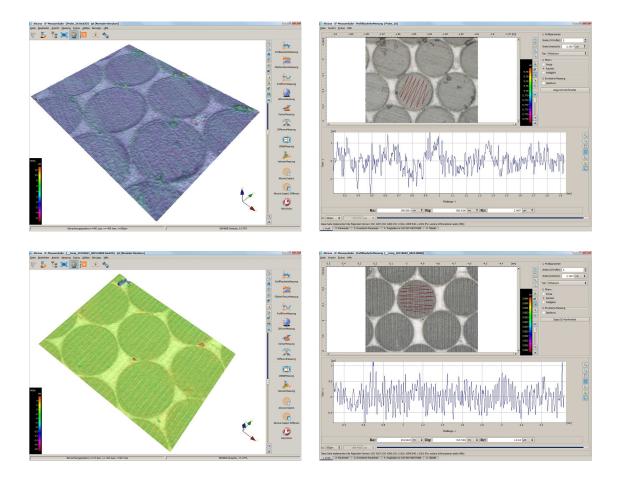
Measurement of surface roughness of fibres after the cutting with a saw blade (upper) in comparison to the cutting with a diamond milling head (lower).
